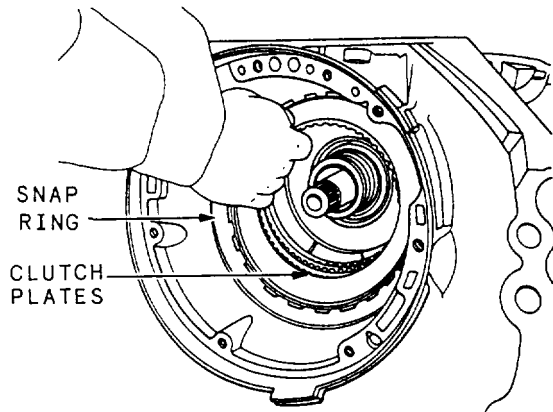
Removing the intermediate backing plate and clutch plate.
